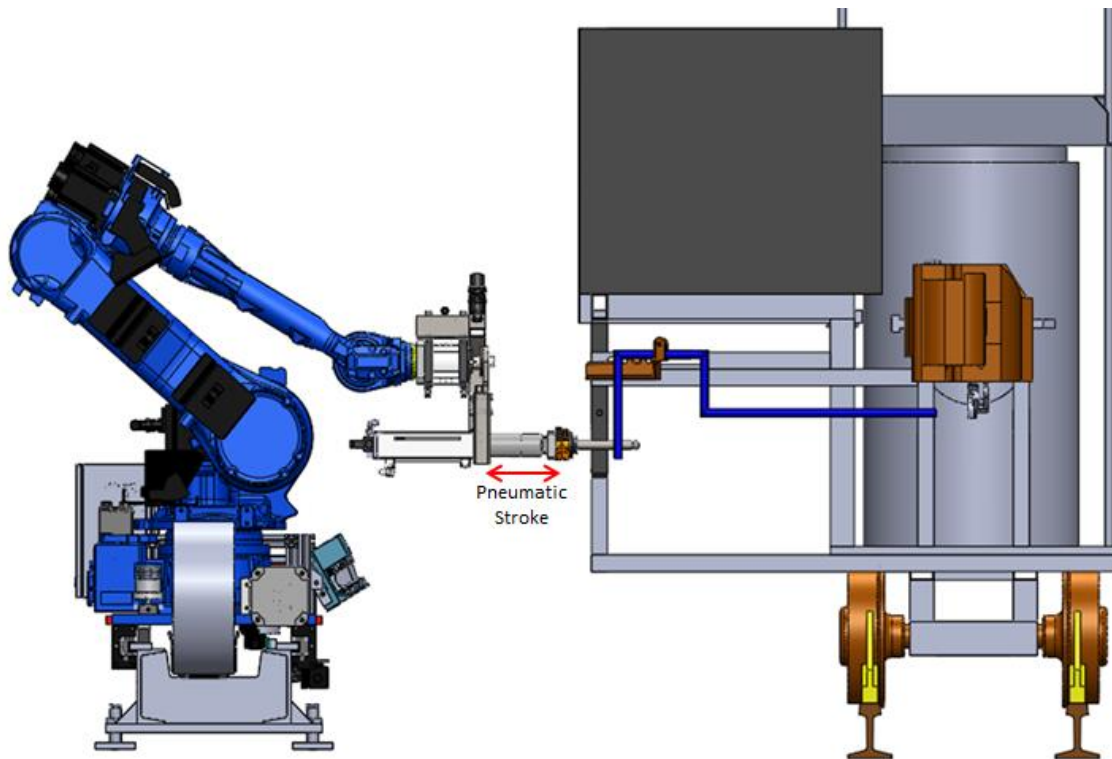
Alignment and extension of pneumatic cylinder for handle pull
